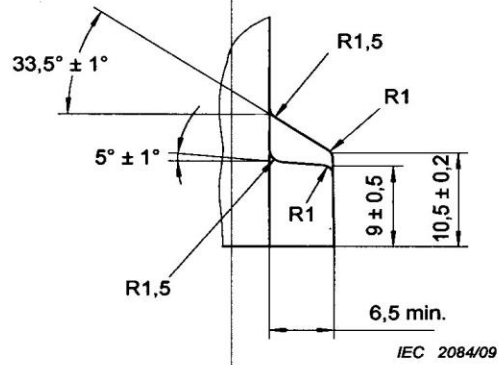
Detail “Y” – Ledges, with dimensions on the short sides
